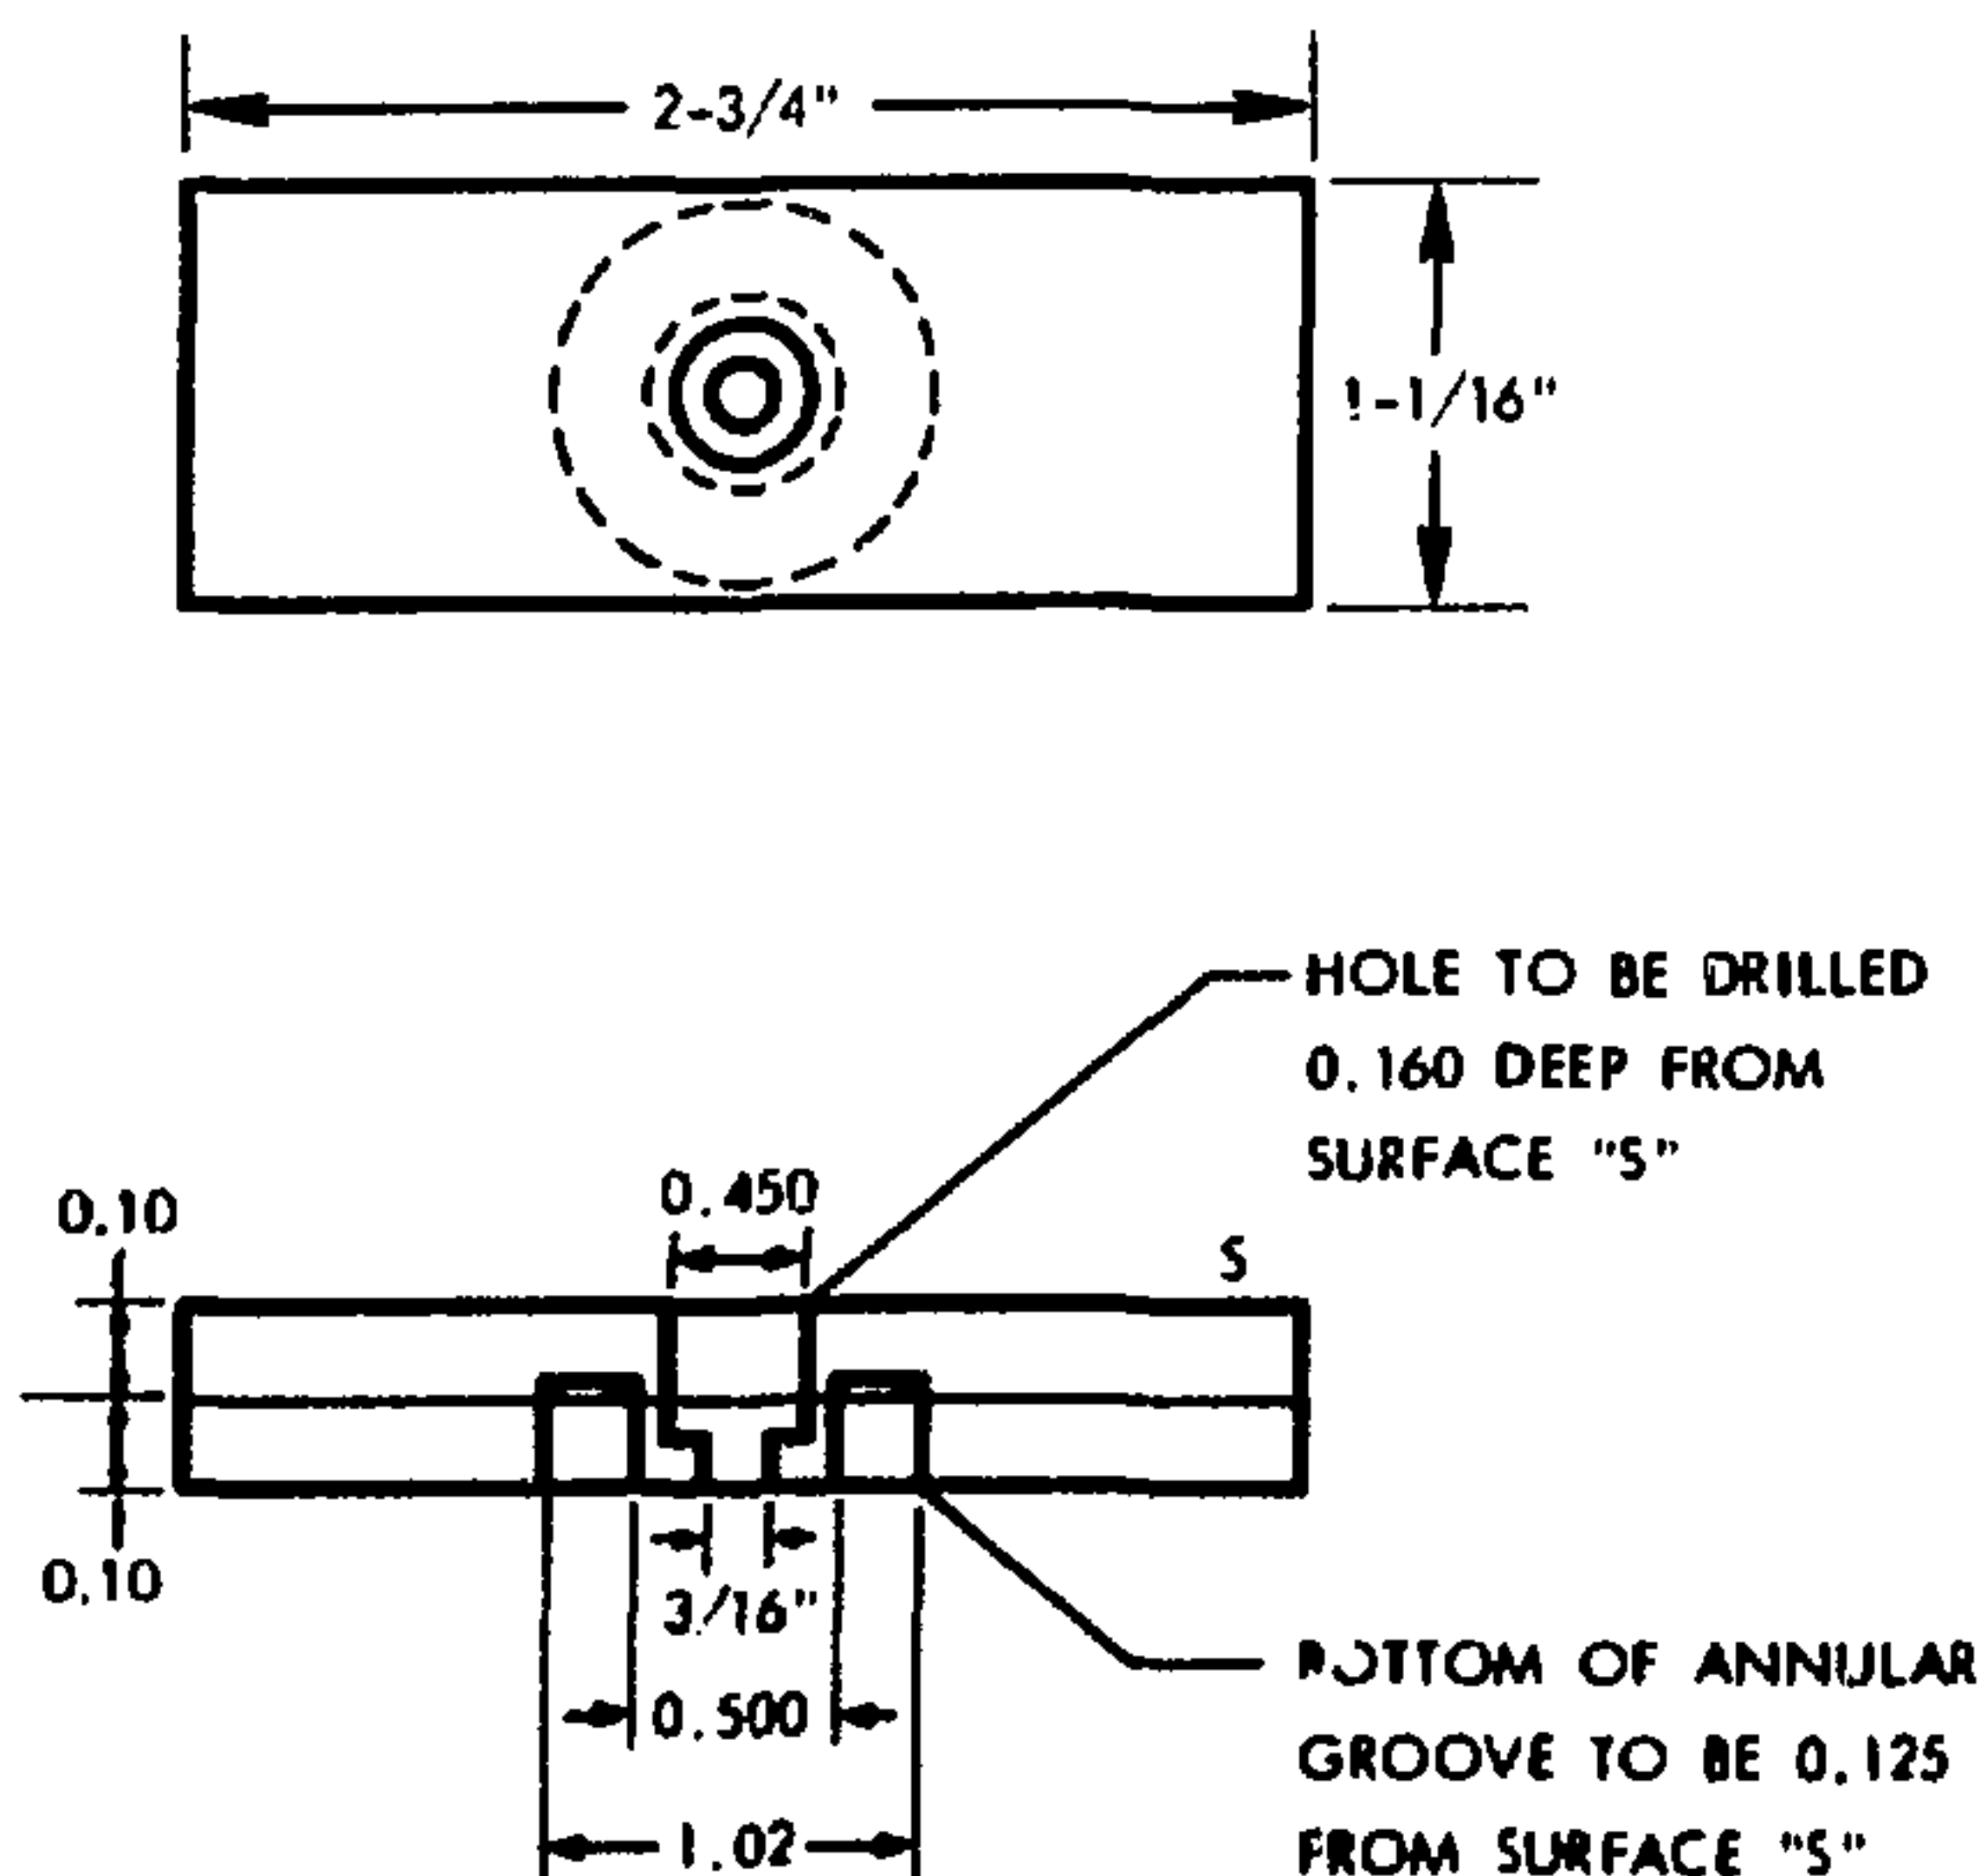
Cross Sectional View of Modified Ollard Test Specimen
